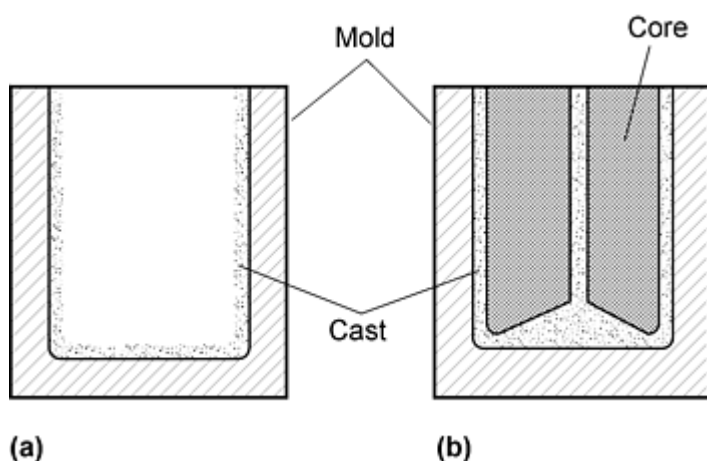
Drain casting (a) and solid casting (b). Source: Ref 6
